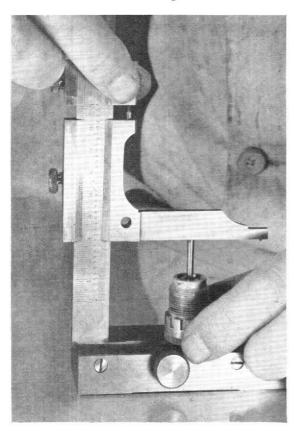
Checking movement under control of resistance spring; using a vernier height gauge.
